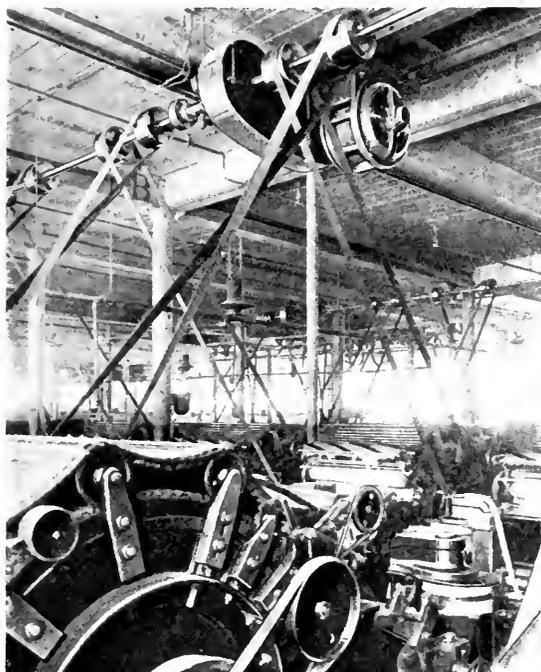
Induction Motors in Card Room with Chain Drive to Countershaft
